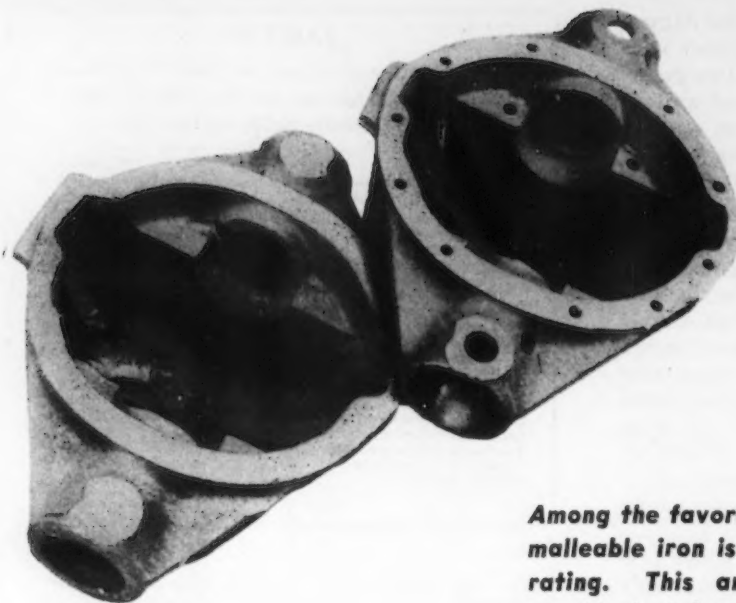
The rough casting "left" and the finished machined part "right," an automotive differential carrier are shown here. The outside face diameter is milled at 215 sfpm without the use of a coolant.
